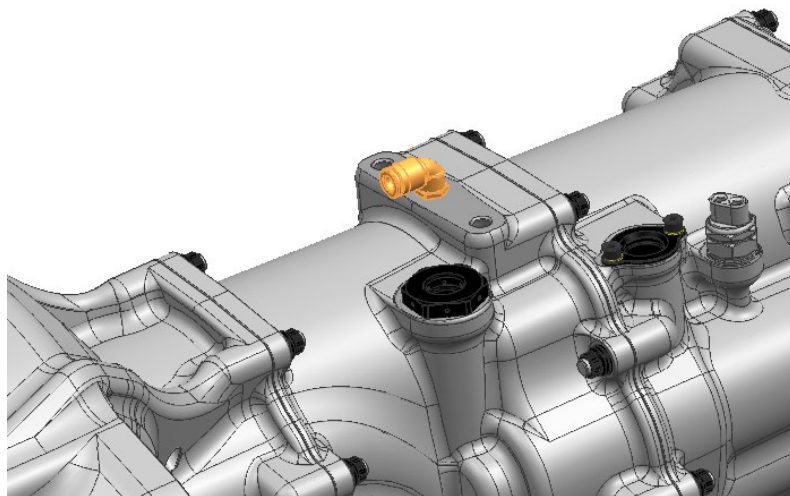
A17-915 Oil Breather swivel push-lock to 'catch can' via 5/16" tube
